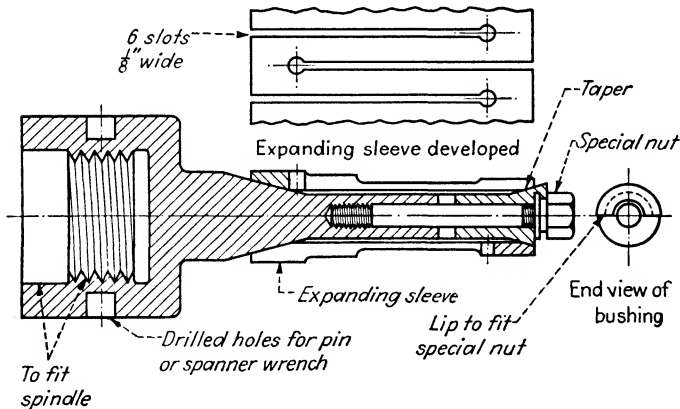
A special flanged nut on the end moves outer cone in both directions.
